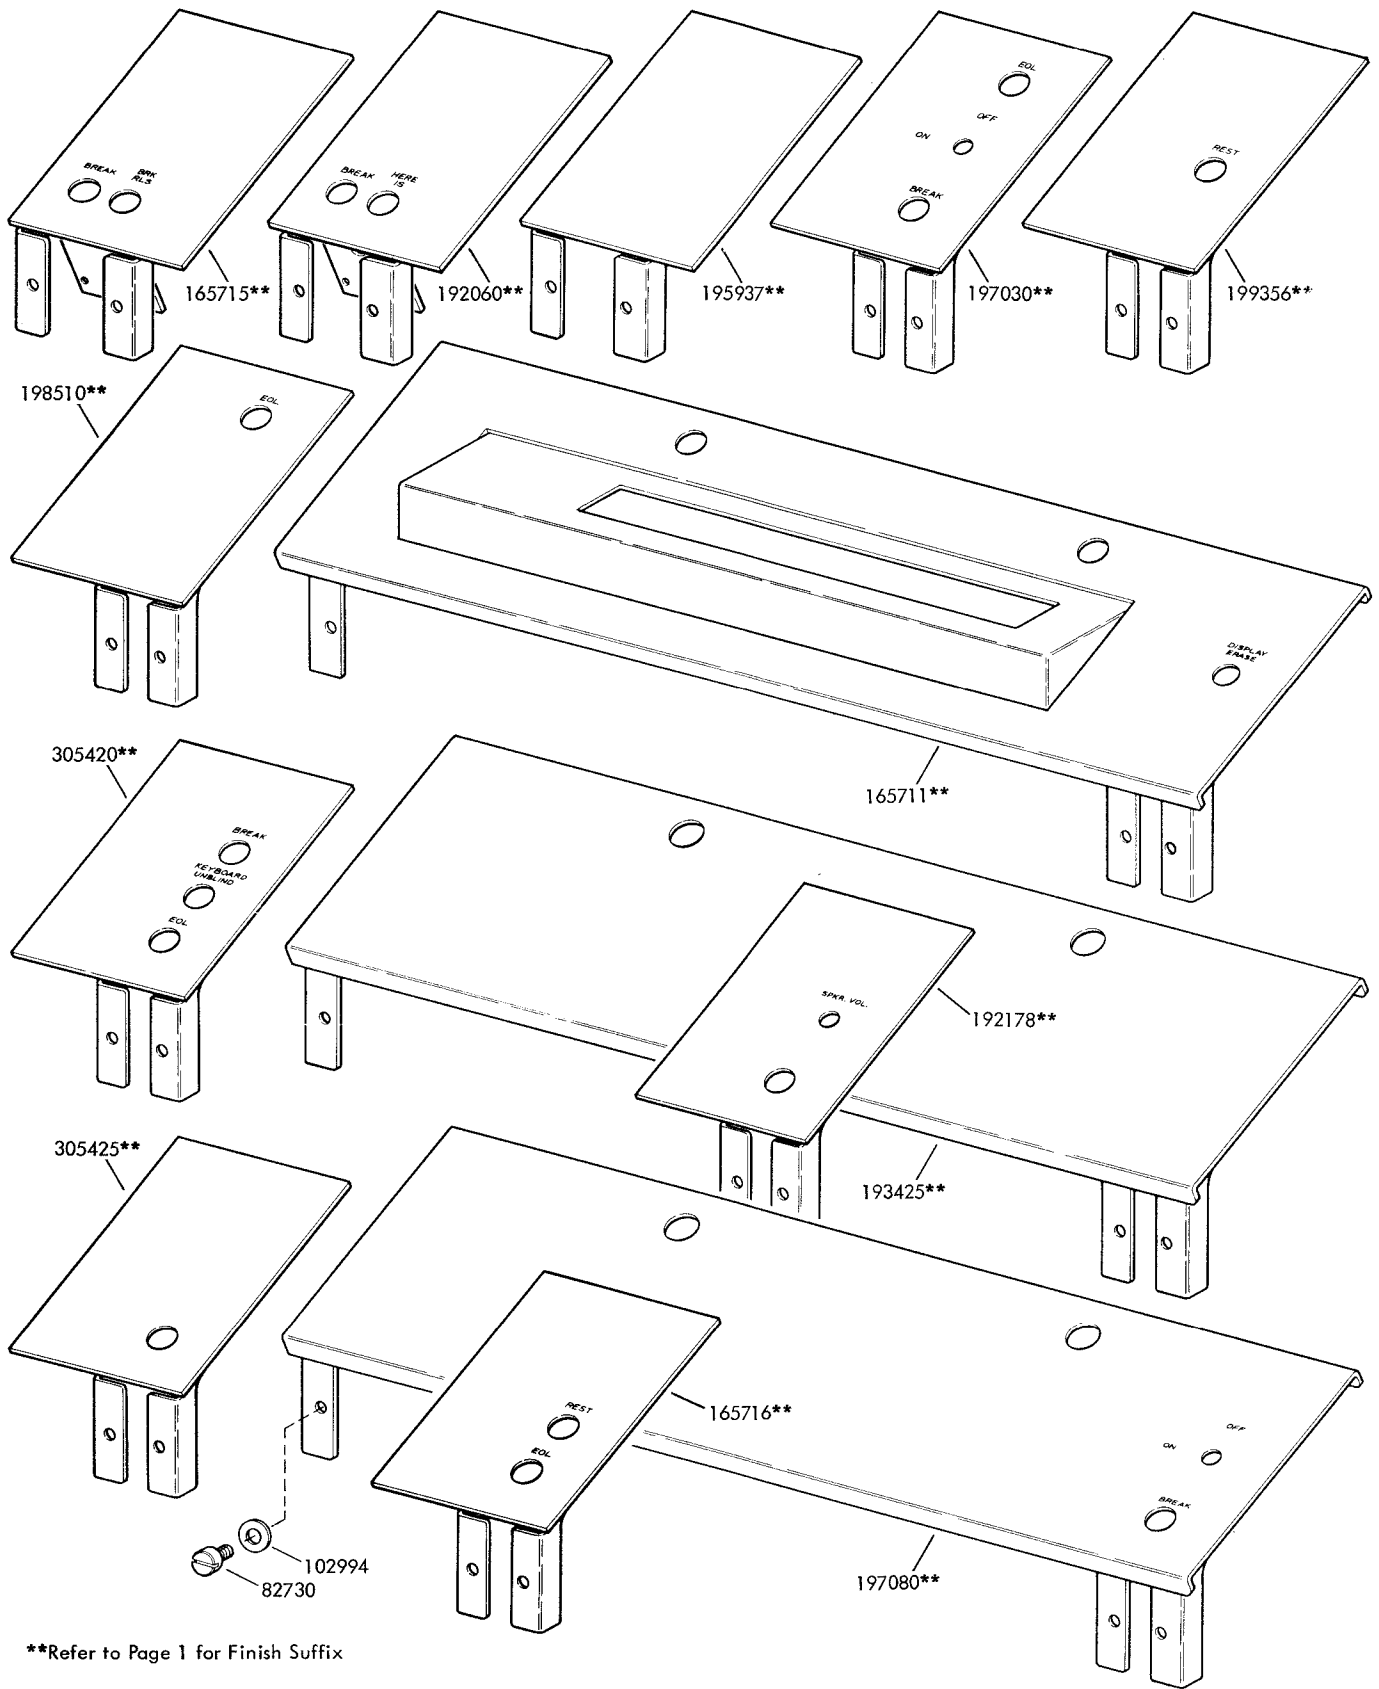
LOWER COVER, PAN, PEDESTAL, AND MOUNTING RACK
